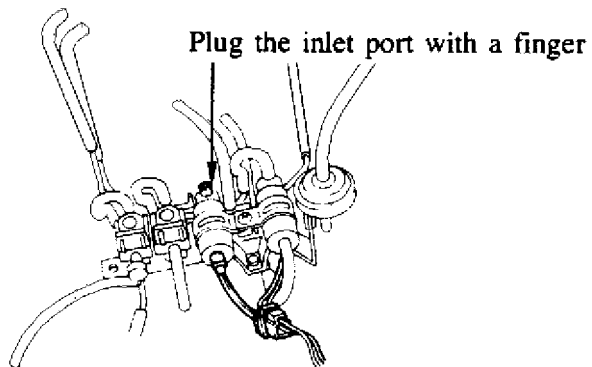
Plugging Vent Solenoid Valve Inlet Port
